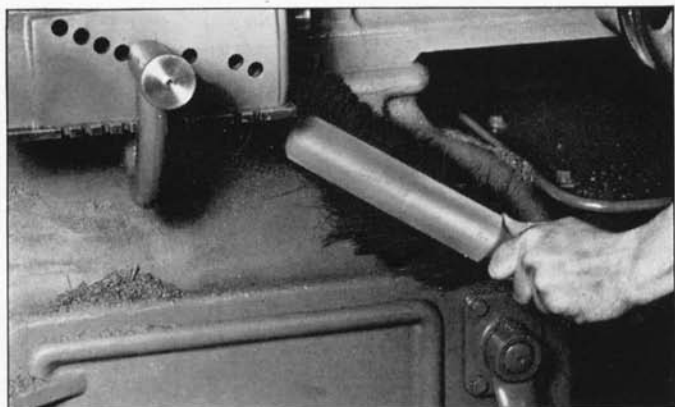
A large brush can be used for cleaning large surfaces of the lathe.
